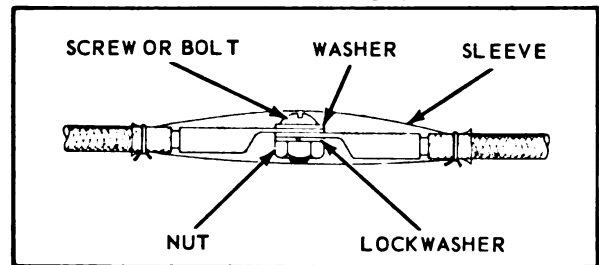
Bolted Terminal Lug Repair of Large Wire
